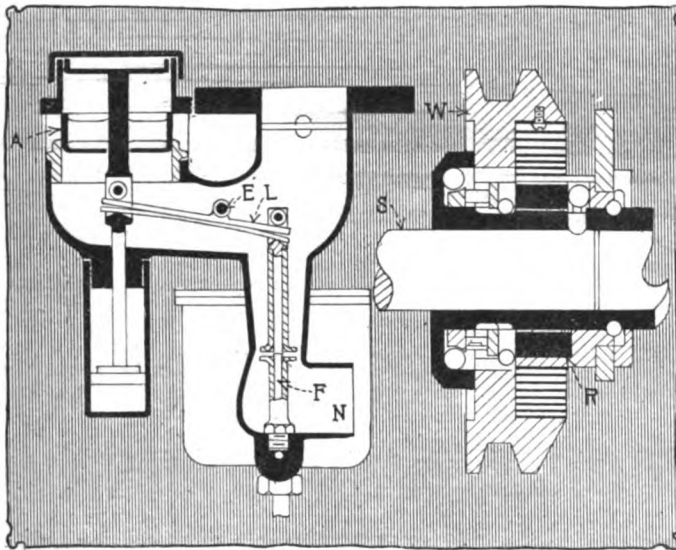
Schulz positive carbureter. Fig. 2—Sharpe starter
